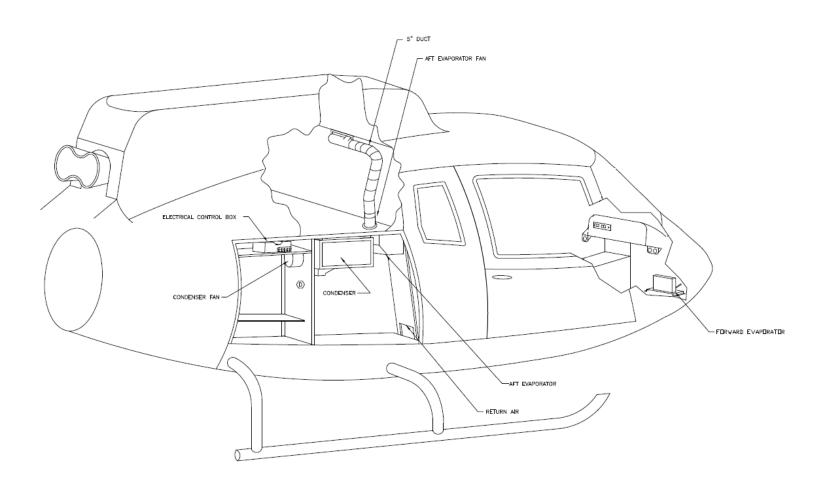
Equipment locations for Air Conditioning System Installation with the -011 Configuration (Side Mounted Condenser)
